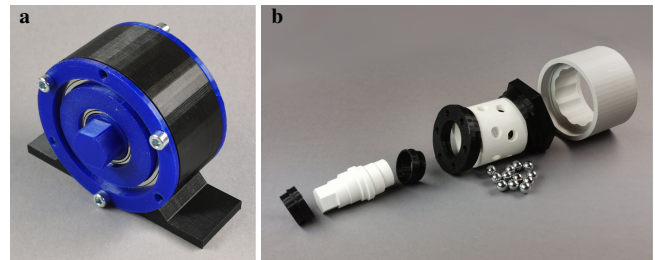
Assembled 3D printed REE drive prototype (a) and disassembled 3D printed parts and rolling elements (b). (Reprinted from [5] under CC BY 4.0)
